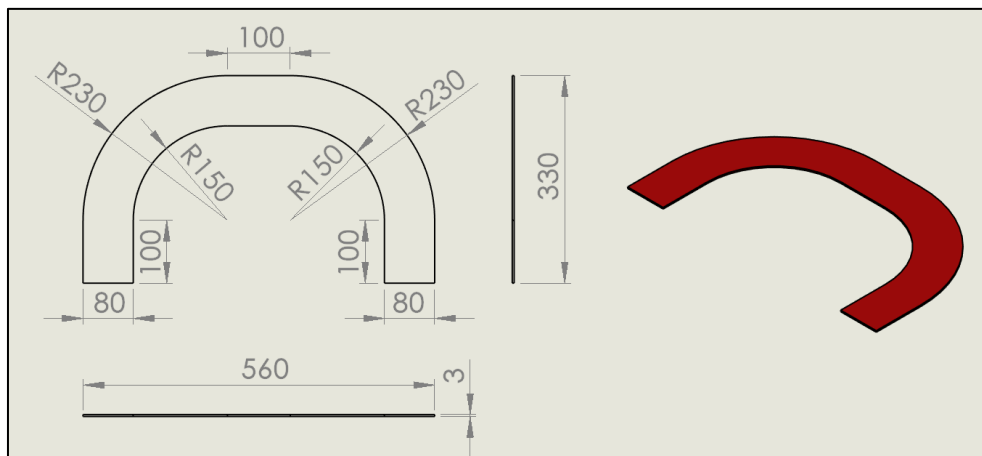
13: Technical drawing of the 'U' shaped black cylinder collection area (in millimeters)
